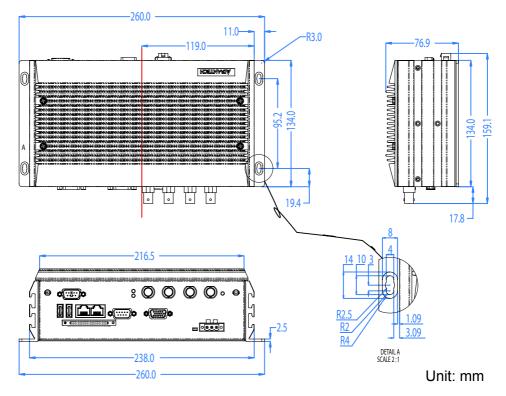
ARK-VH200 Mechanical dimension drawing
